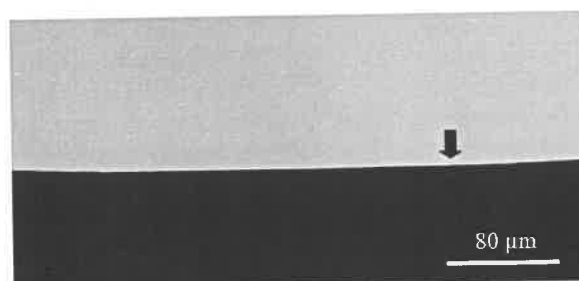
Rake face of the worn single-crystal diamond tool after machining electroless nickel in 3.18 km cutting distance. The worn part of the diamond tool looked like almost straight line.
